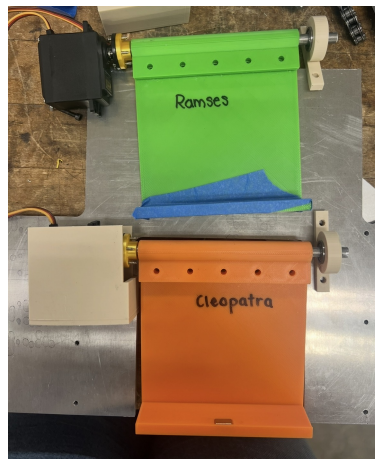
Assembled Dumping Mechanisms for Both Robots Before Full Robot Assembly.
